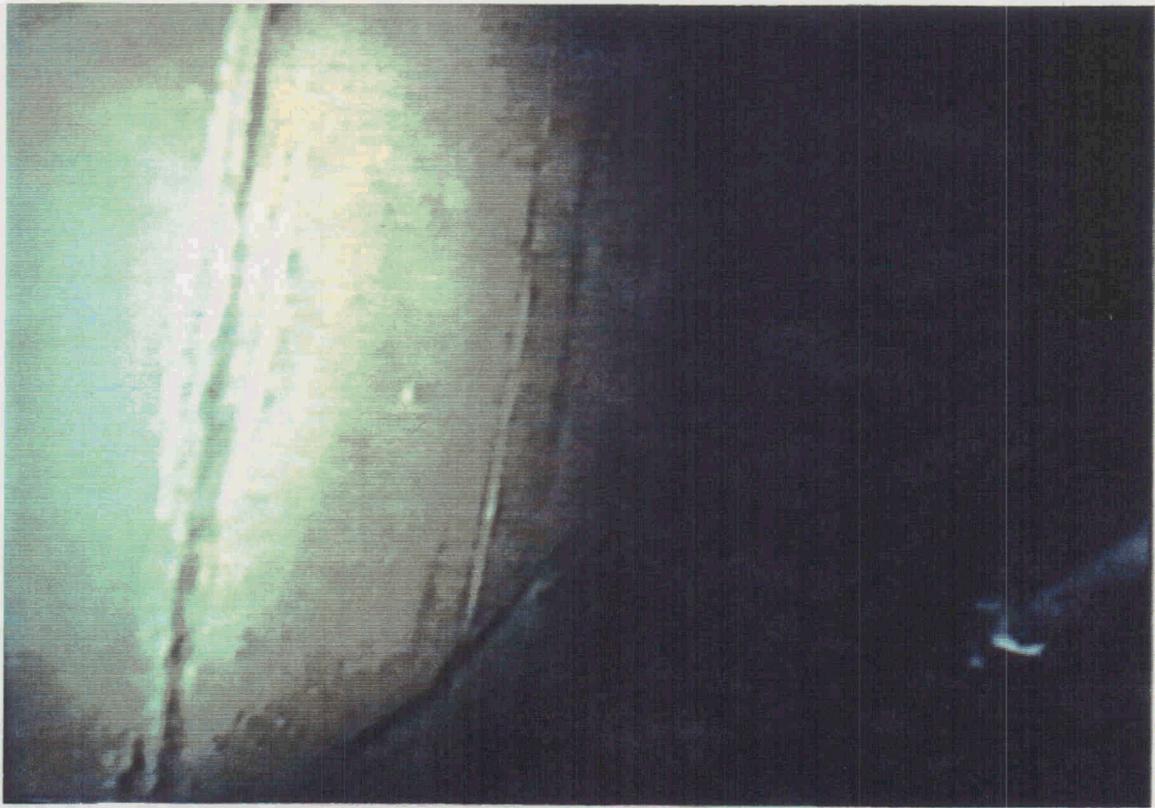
Welded seam with zinc coating melted back from joint.
